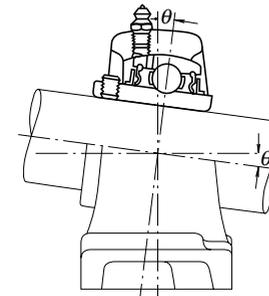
Permissible Misalignment of Ball Bearing Units
